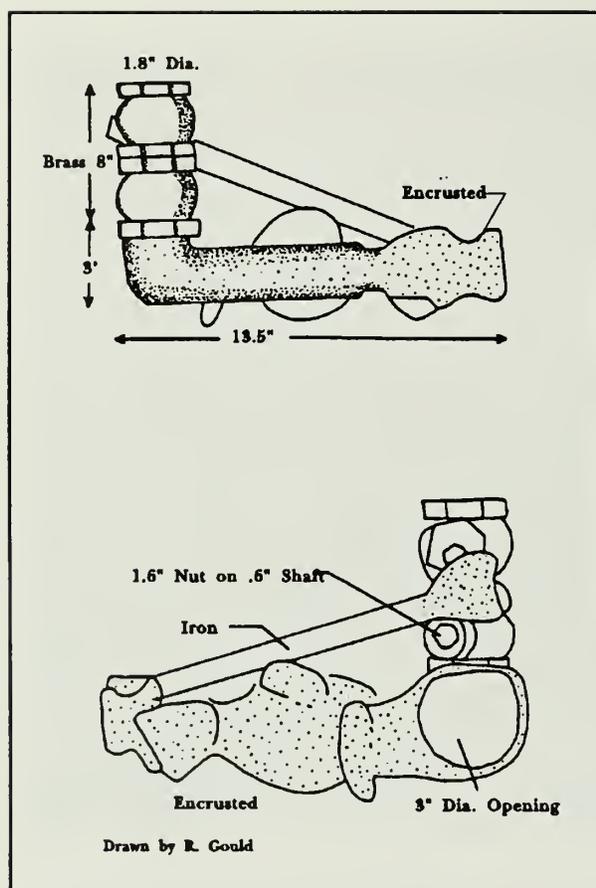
Valve assembly. Drawing by Richard A. Gould.
